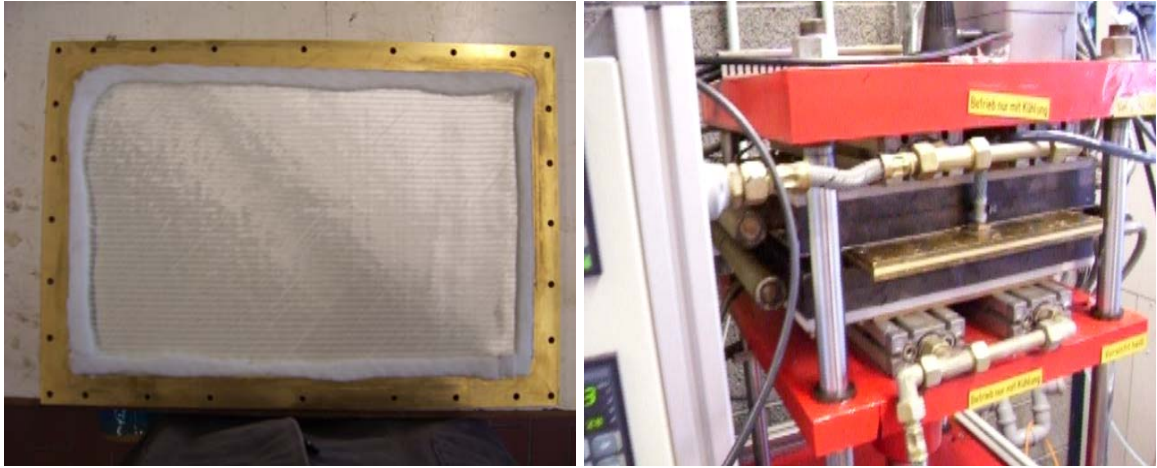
The photos of cut fabric pre-form placed into mold and the resin injection system.
